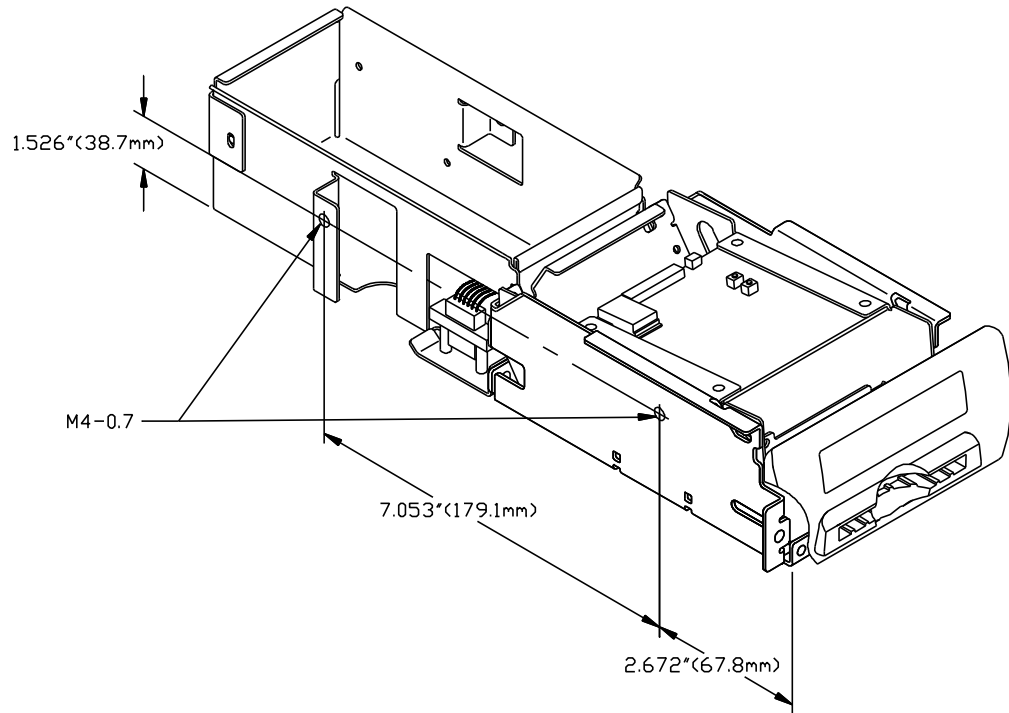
Chassis Mounting: Side of Main Chassis/Ticket Supply Box
